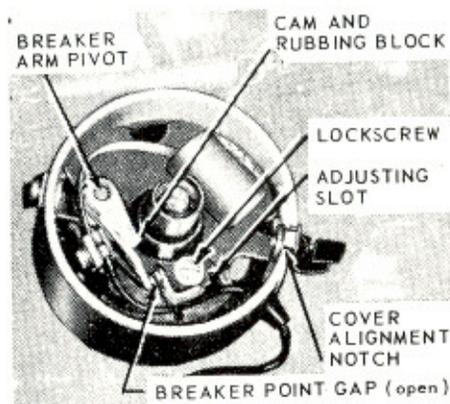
DISTRIBUTOR BREAKER POINTS
